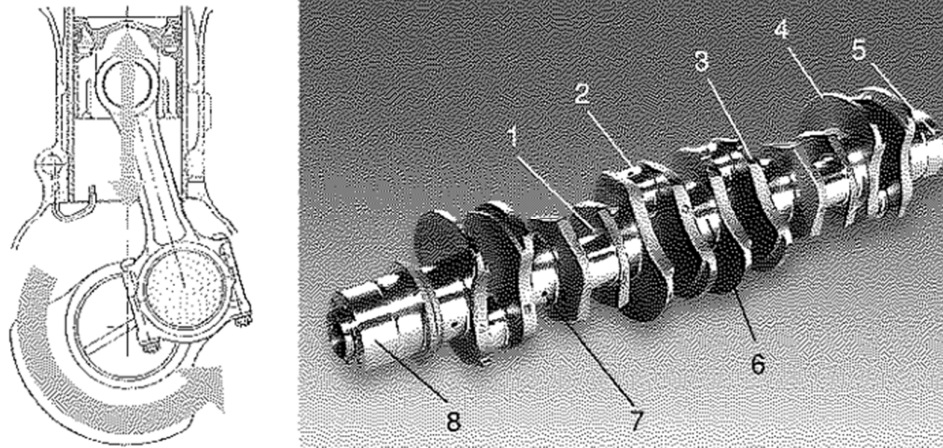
(a) Schematic view of an engine illustrating the crankshaft rotation and piston motion (b) Schematic view of a crankshaft showing the main parts; 1-Side walls, 2-Pin journal, 3-Web, 4-Counterweight, 5- Rear end, 6- Main journal, 7- Oil hole, 8-Front end [45].
